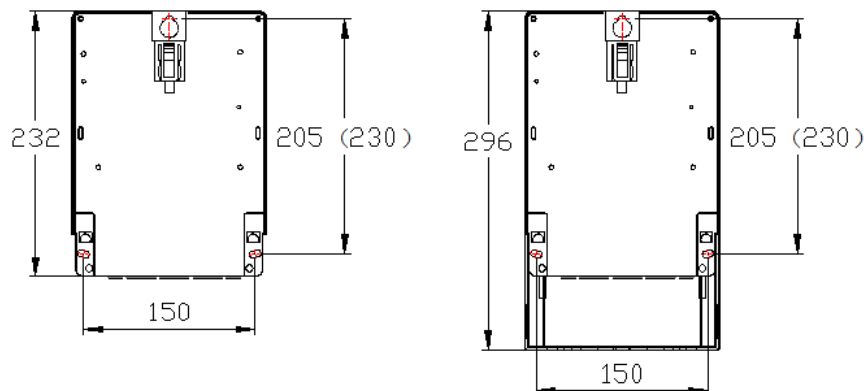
Mounting bracket location at the back of the meter (standard terminal cover and long terminal cover)
